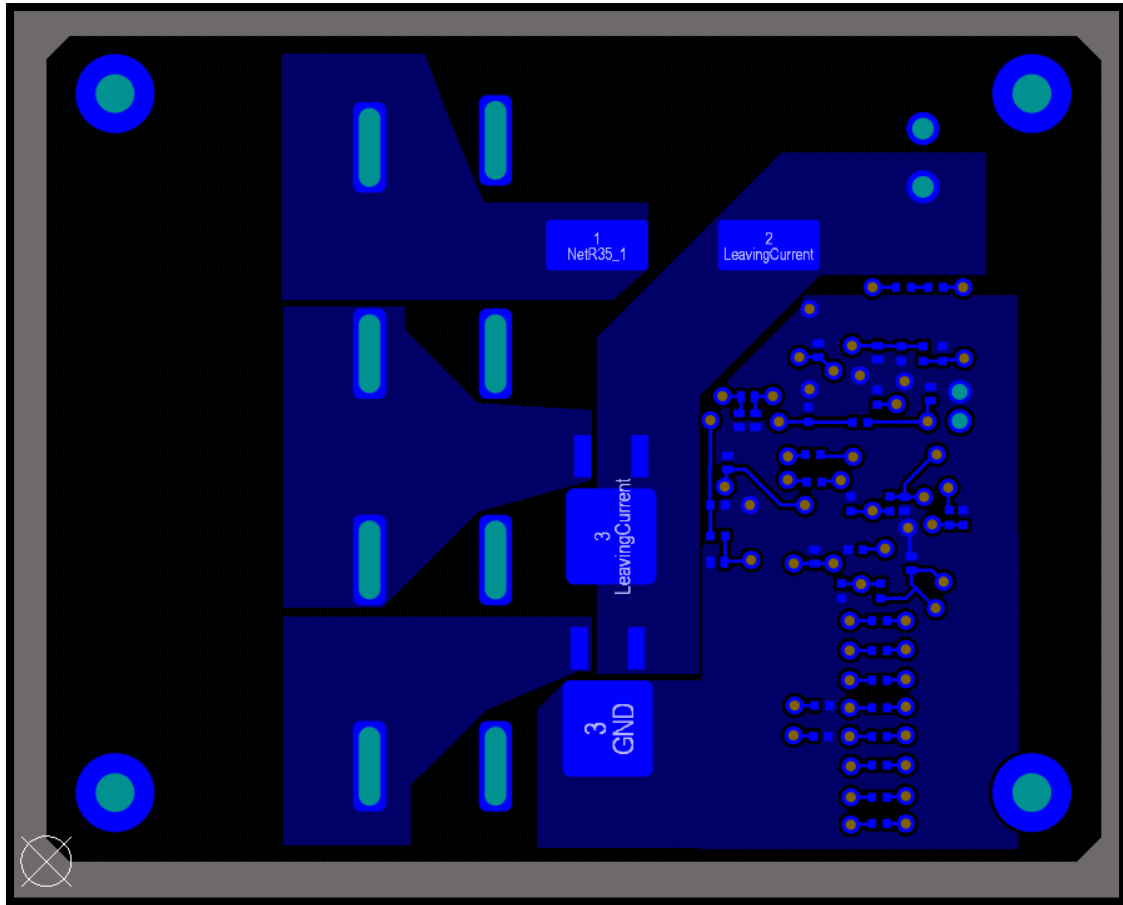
The 2D View of the Bottom Layer of the Finalized PCB
